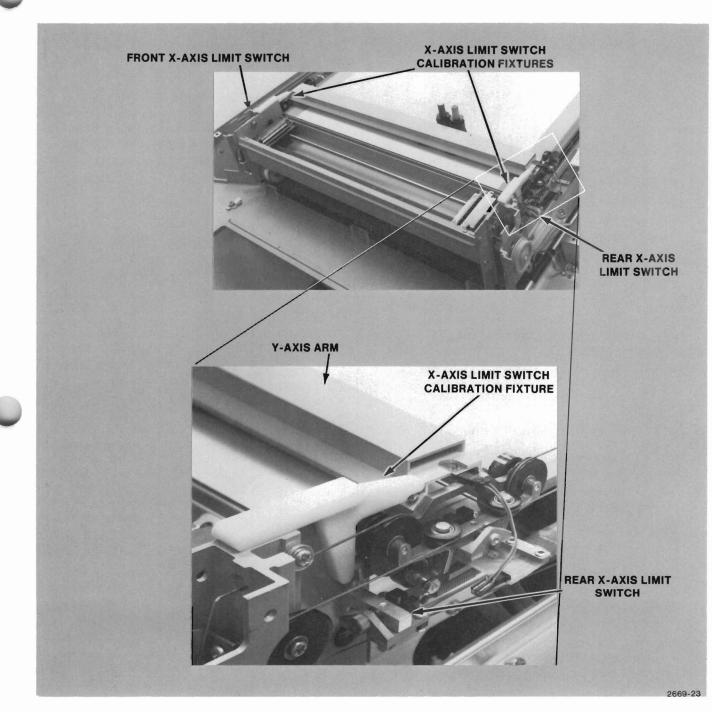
X-Axis Limit Switch Calibration Fixture Placement.
